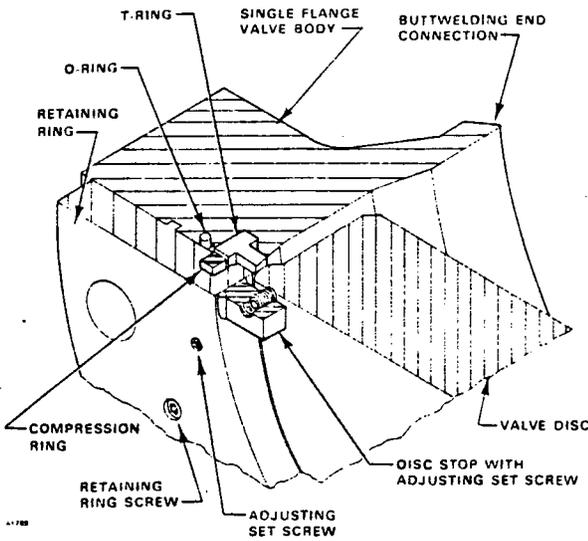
9200 Series Specification B-1 Valve T-Ring Details (Optional Single-Flange/Buttwelding End Construction)
